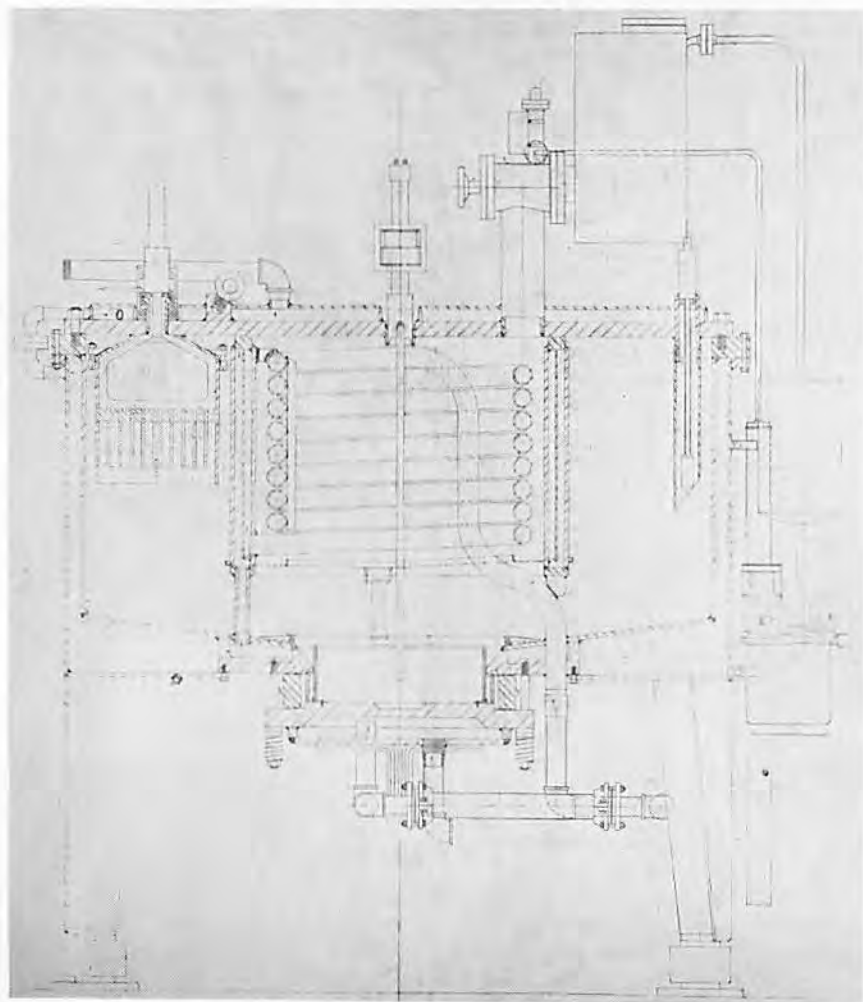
Vertical Section of typical Rectifier Tank showing arrangement of parts.
